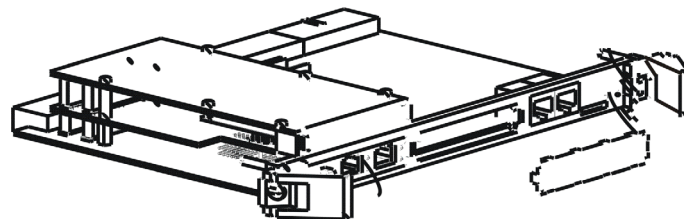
Installation of PPMC-280 with Transposer Card on Carrier Card
